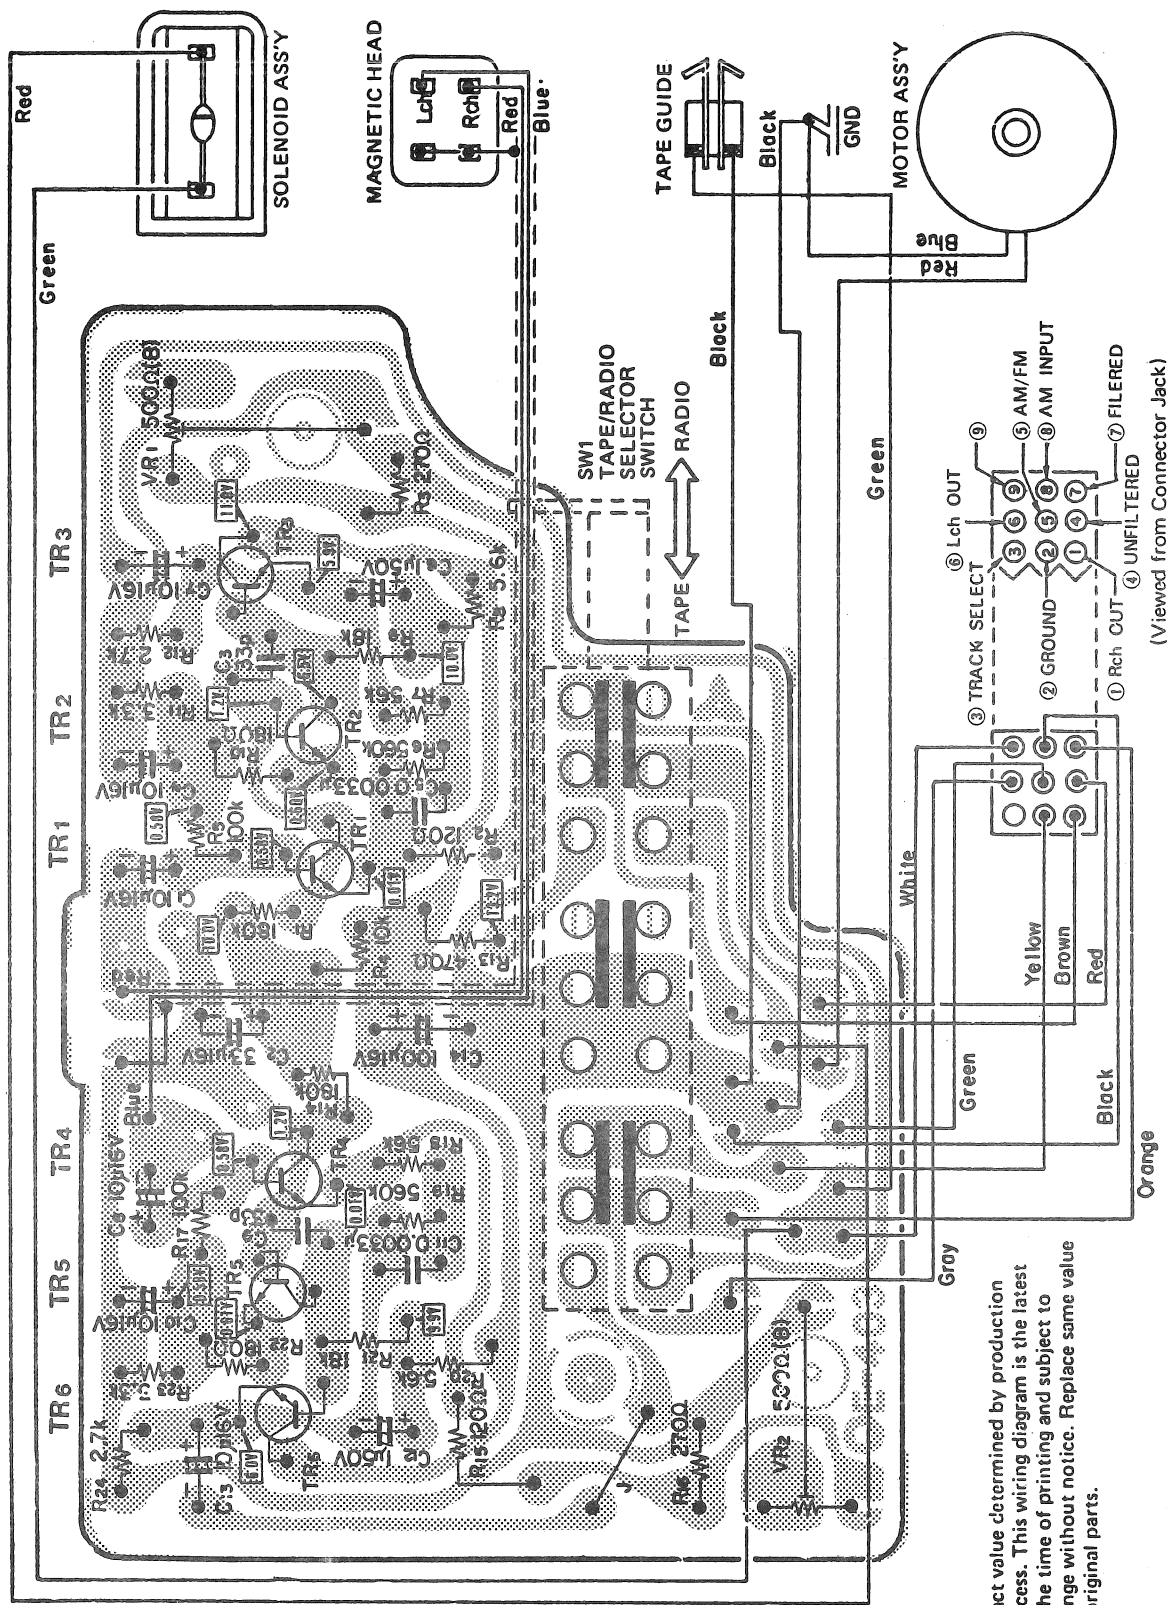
B PRINTED CIRCUIT BOARD, TAPE PREAMPLIFIER BOARD (3597832)
